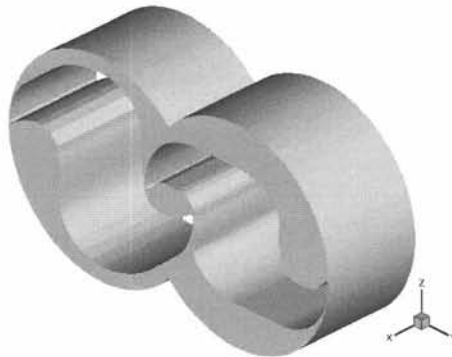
The casing of the double-tooth compressor geometry in figure 6.3
